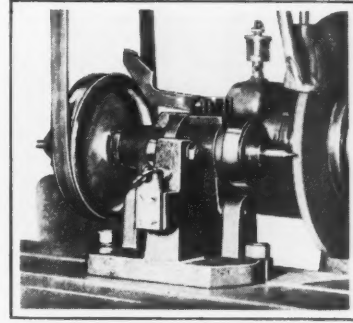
Grinding the Relief on Gear-tooth Chamfering Cutters
